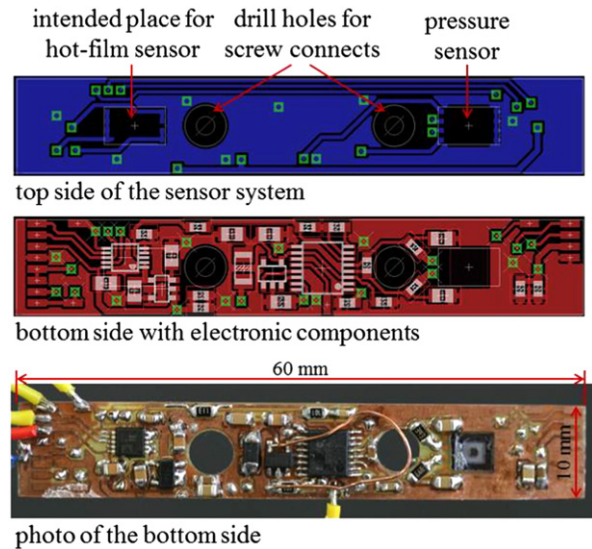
Computer-aided design (CAD) drawings (*above and center*) and a photograph (*below*) of the PCB including all relevant electrical components. The pressure sensor is already included; the hot-film sensor will be mounted later at the marked position.
